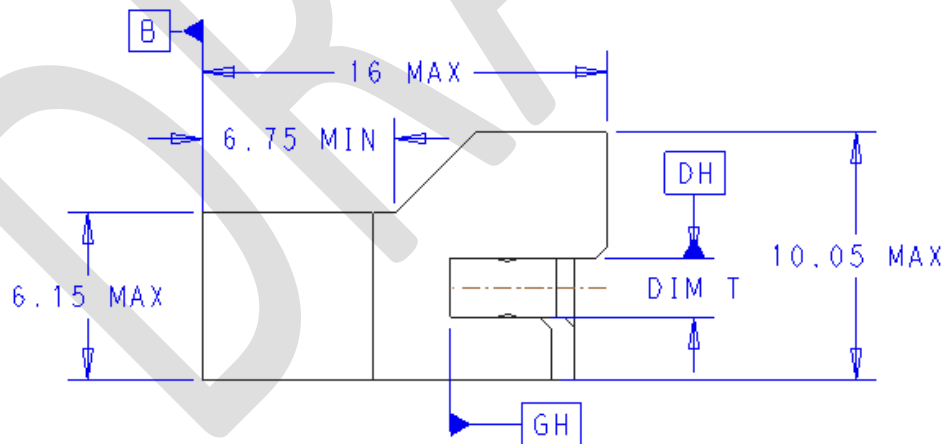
1C, 2C, 4C AND 4C+ STRADDLE MOUNT CONNECTOR PROFILE DIMENSIONS (MM)
